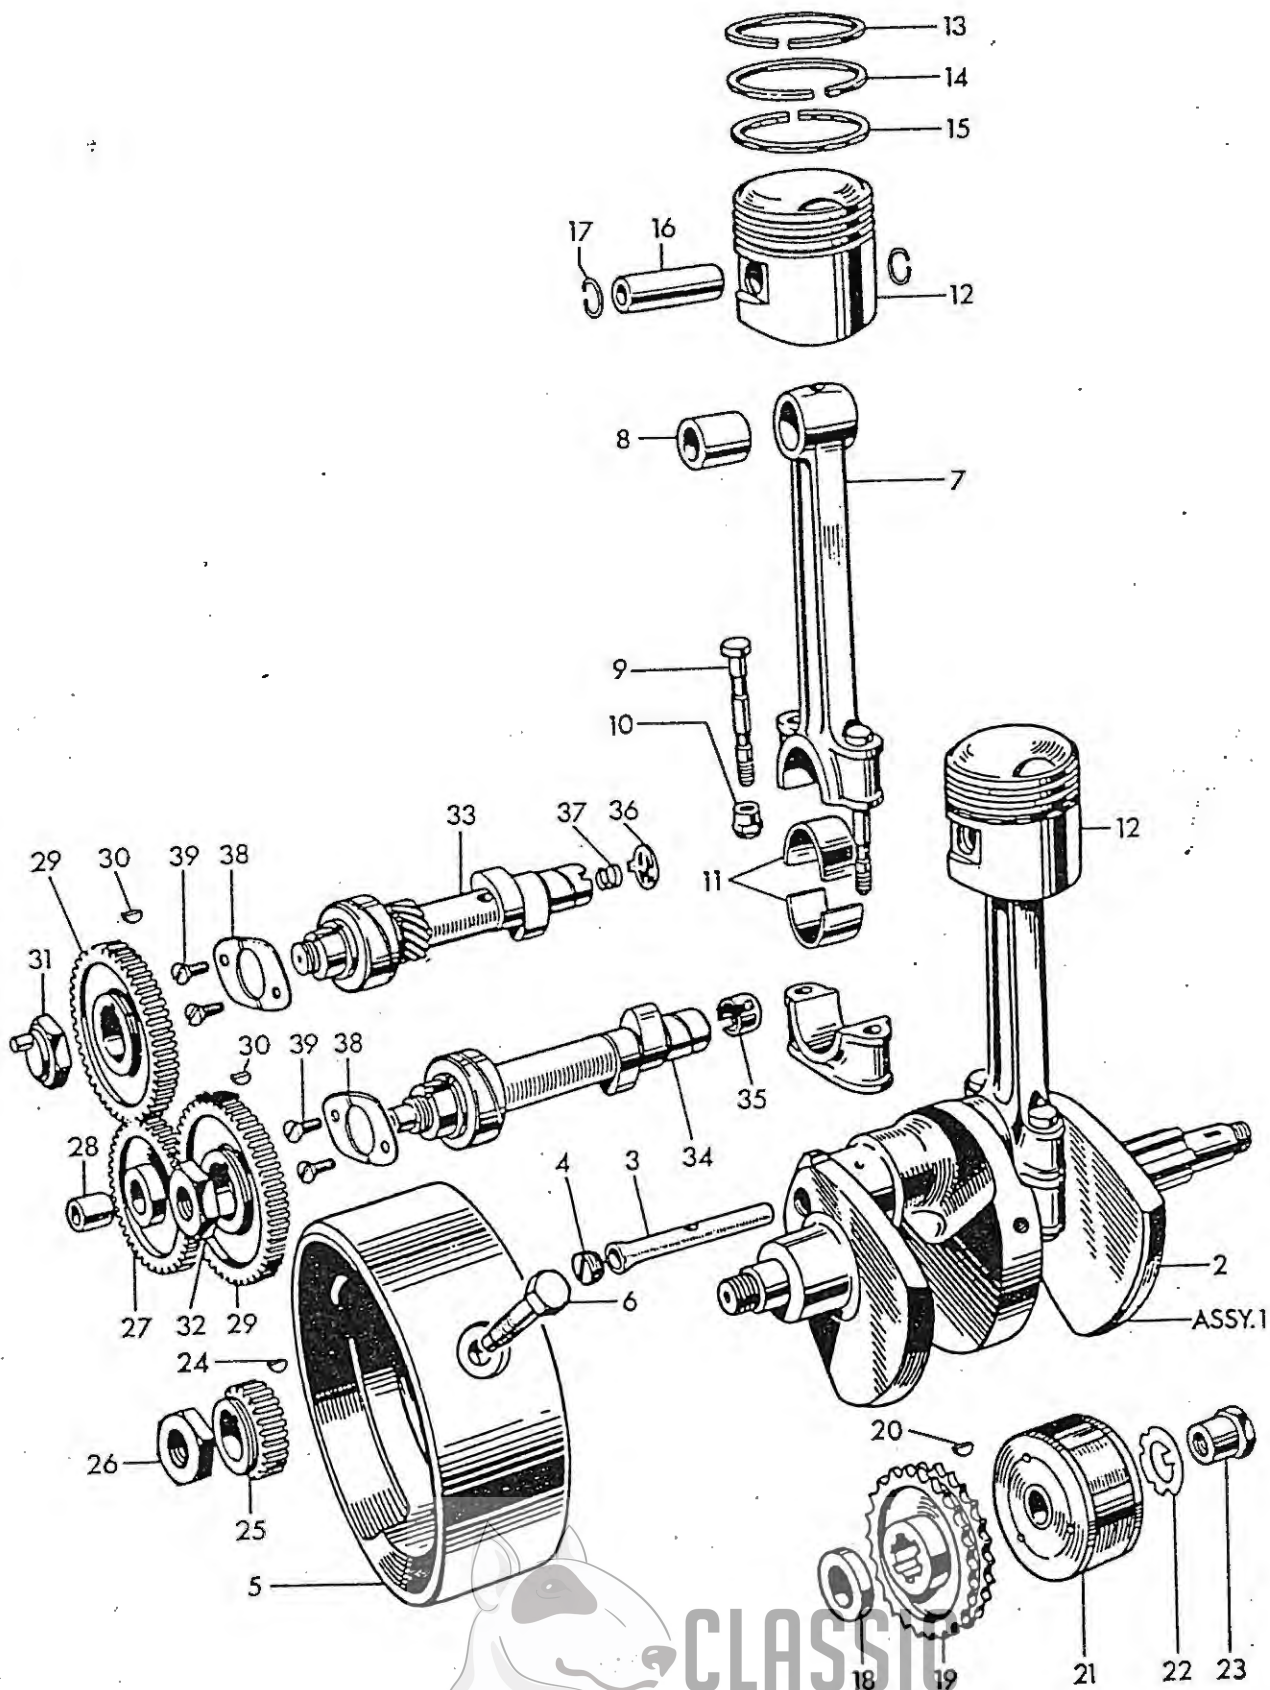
CRANKSHAFT AND CONNECTING RODS
